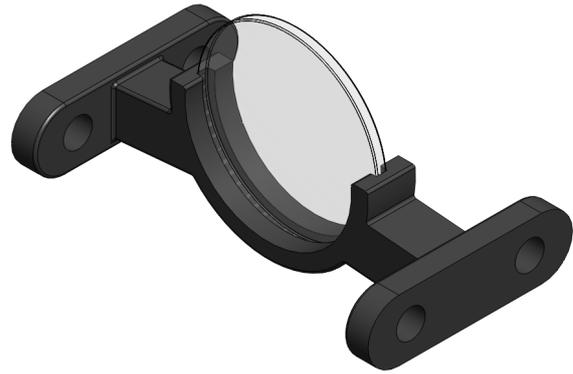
CAD model of the lens holder assembly, designed to be 3D printed.
